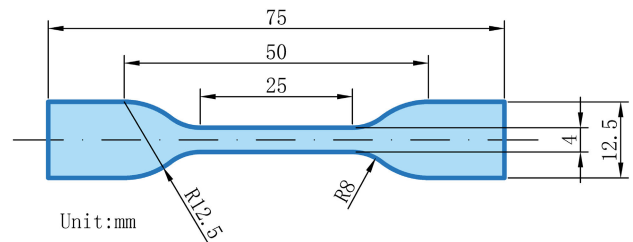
Geometric dimensions of type 5A tensile test specimens.
